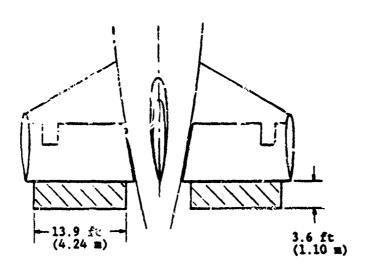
Beam view and bottom view of sternplane aft extensions for SSN 637.
